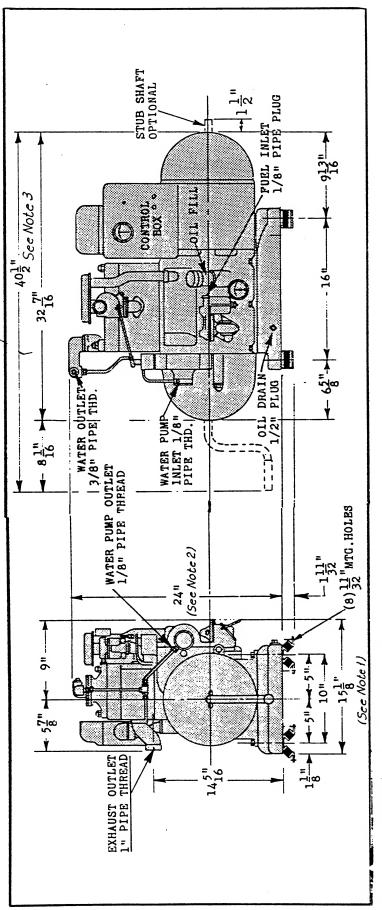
INSTALLING VIBRATION DAMPENERS
